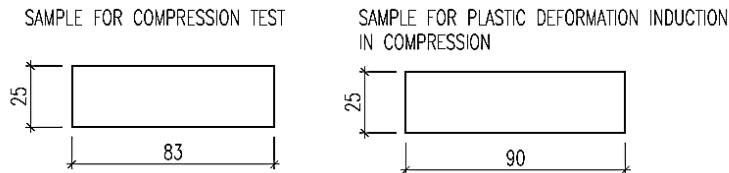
Specimens made of hot rolled sheet for compressive and tensile test
